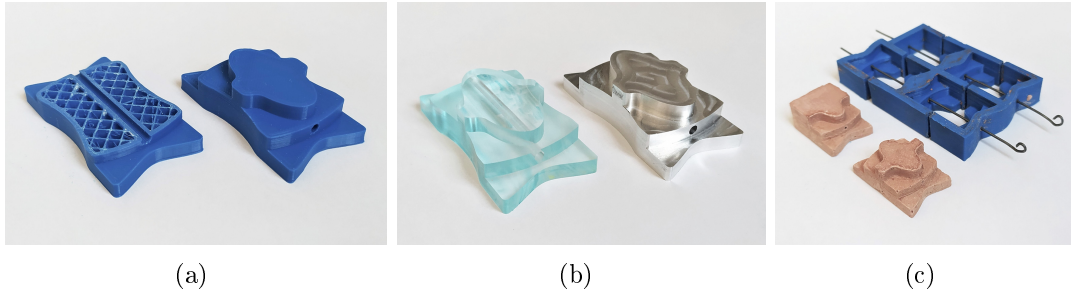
Different ways to manufacture the segments: (a) 3D printing with a plastic filament; (b) CNC milling from solid acrylic or aluminium; (c) casting in molds.
